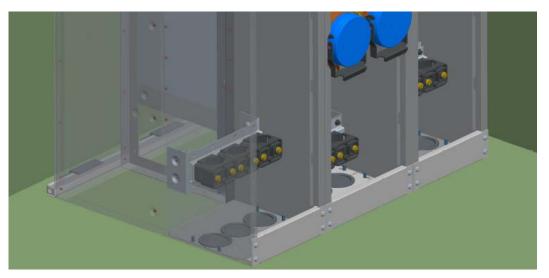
DR-6C medium-voltage switchgear installed in its definitive installation room
